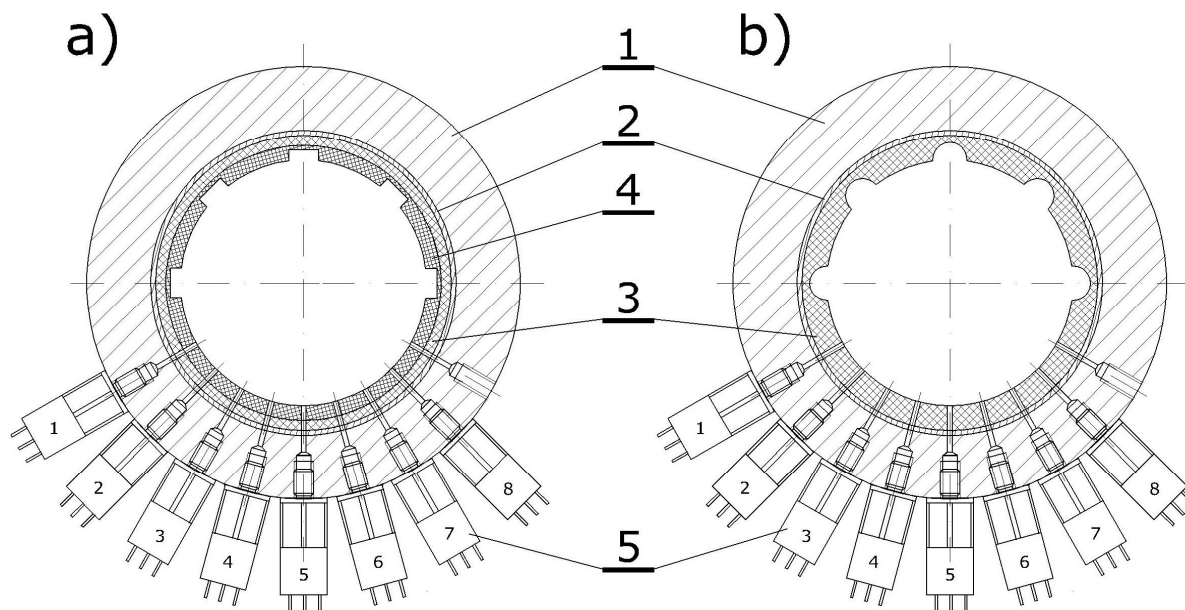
Tested bearings; a) three layer bearing, b) rubber bearing; 1 - steel sleeve, 2 - bearing steel sleeve, 3 - NBR, 4 – PTFE layer, 5 – pressure sensors installed in steel sleeve
